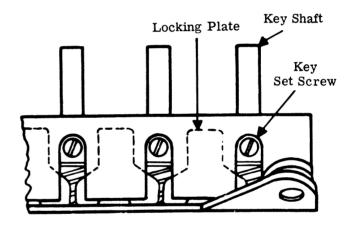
Key Assembly Interior Showing Parts Involved in Pick-Up-To-Signal Conversion
